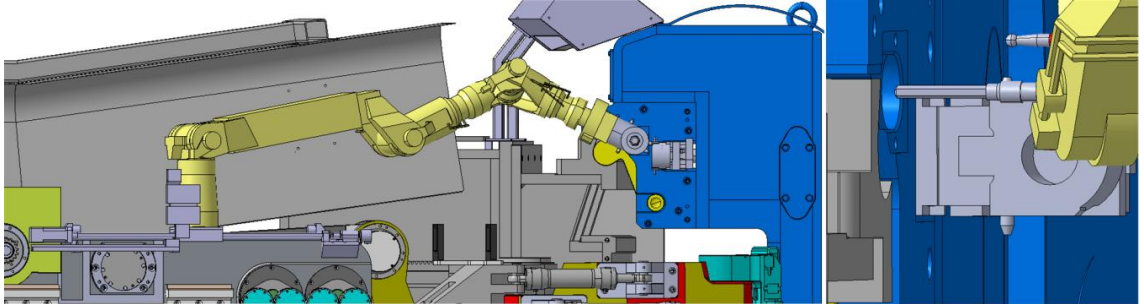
Reach the pin tool to pin slot and illustrated camera view
